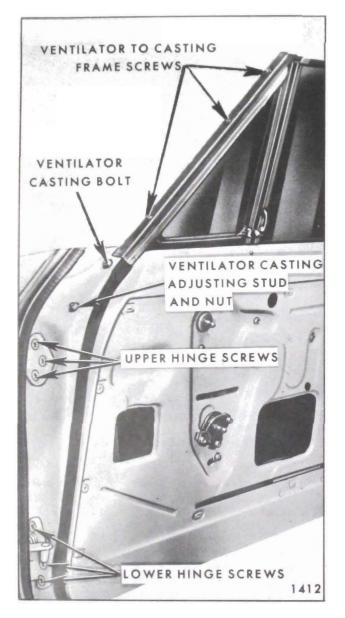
Front Door Hinges and Ventilator - ''X'' Styles
